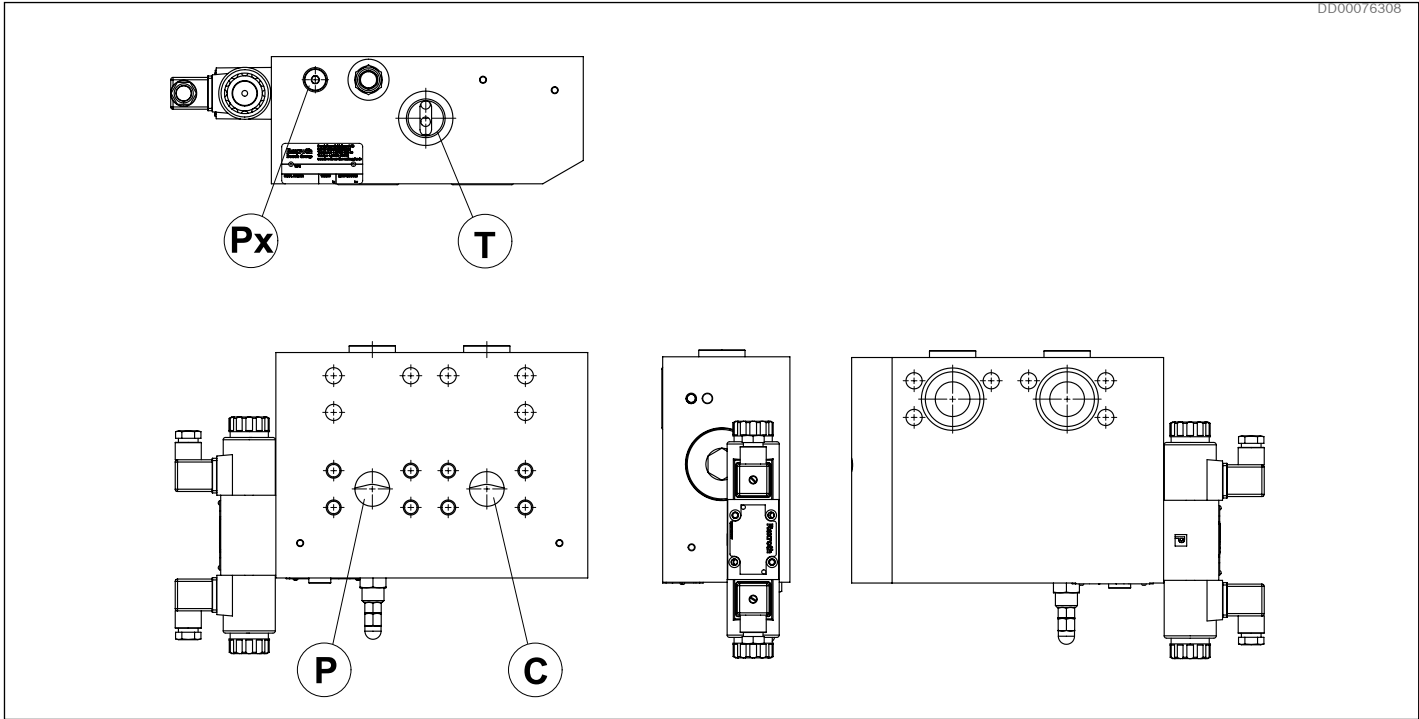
Installation drawing - VFWCB 600 E, VFWCB 600 E Ex
